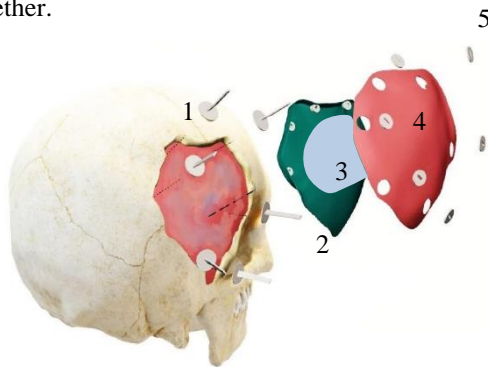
Exploded view of all the components of the cranial implant prototype. 1) Self-locking ties, 2) Inner layer, 3) Intermediate layer, 4) External Layer, 5) Washers.
